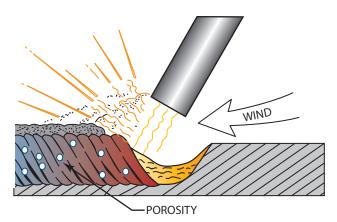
Wind can blow shielding away from the molten weld pool, allowing porosity to form in the weld.
